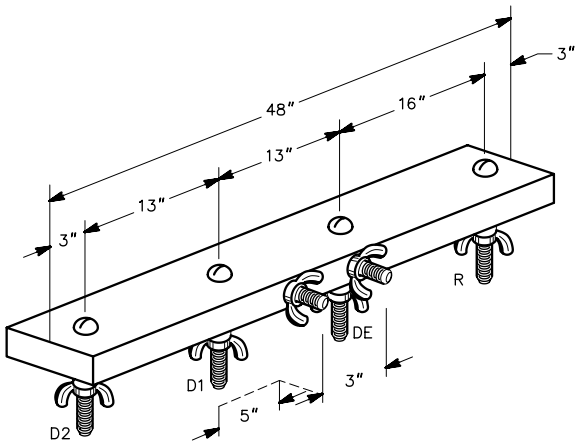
Detail of the boom showing hole center locations and boom to mast connection points.
